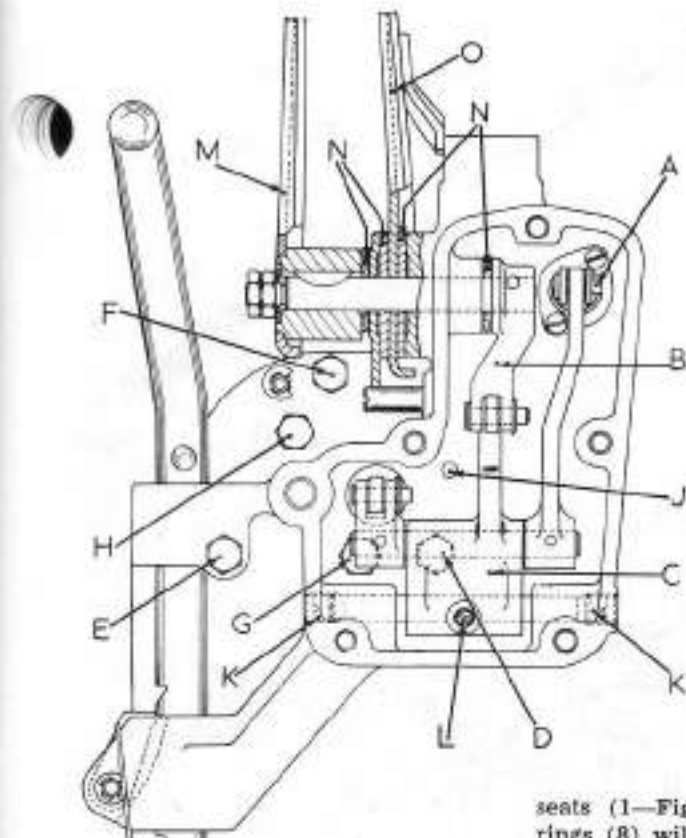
View of control lever mechanism with cover removed and control lever shaft section cut-away. Refer to Fig. 156 for exploded view of mechanism.
